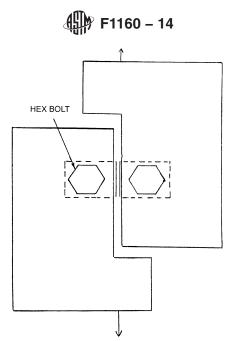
Drawing of the Recommended Shear Test Specimen Assembly
